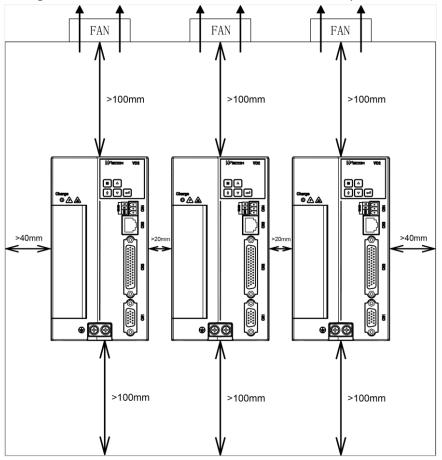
Parallel installation dimensions of multiple VD2B drive
